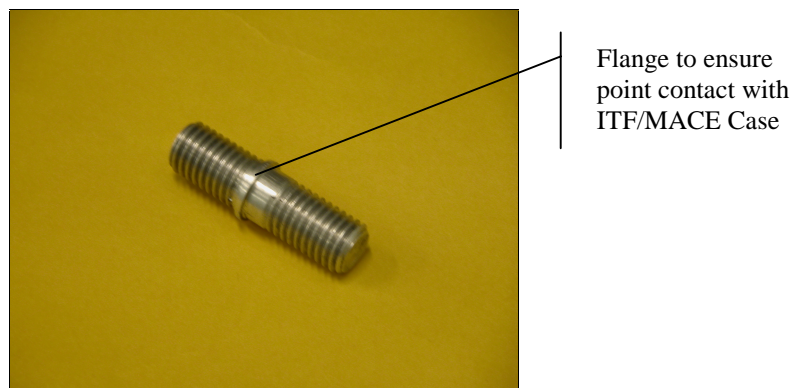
Purpose designed bolt for connecting the MACE Case to the ITF.
